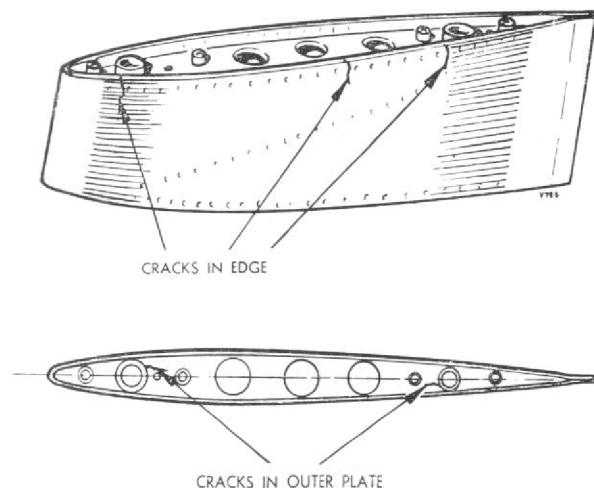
Location of repairable cracks in exhaust cone fairing.
